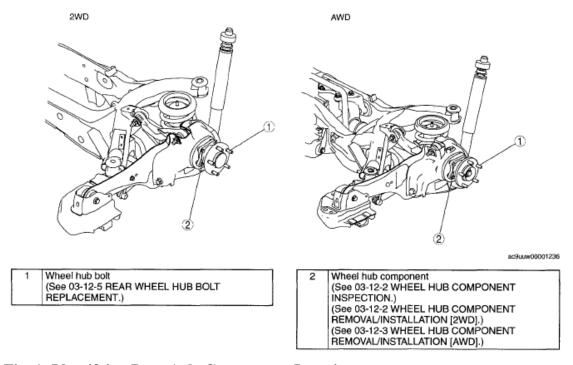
Identifying Rear Axle Components Location Courtesy of MAZDA MOTORS CORP.
